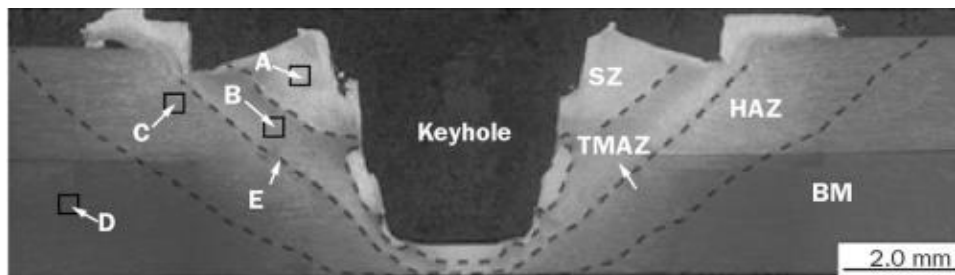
Weld zones in conventional FSSW [20].
